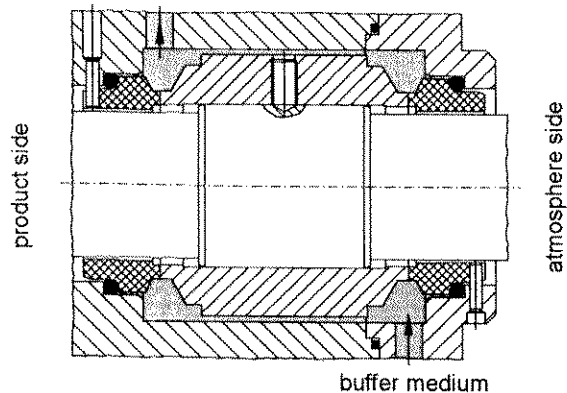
Double-acting mechanical seal in a back-to-back arrangement
